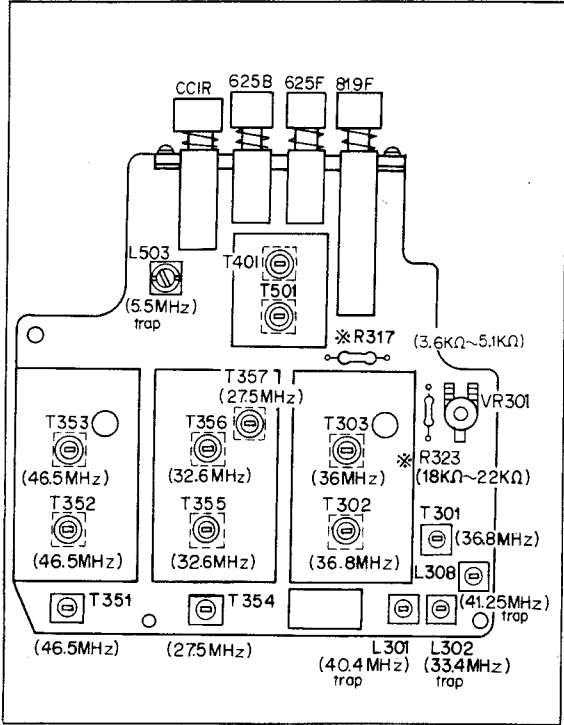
Adjusting parts location of VIF and SIF adjustment
